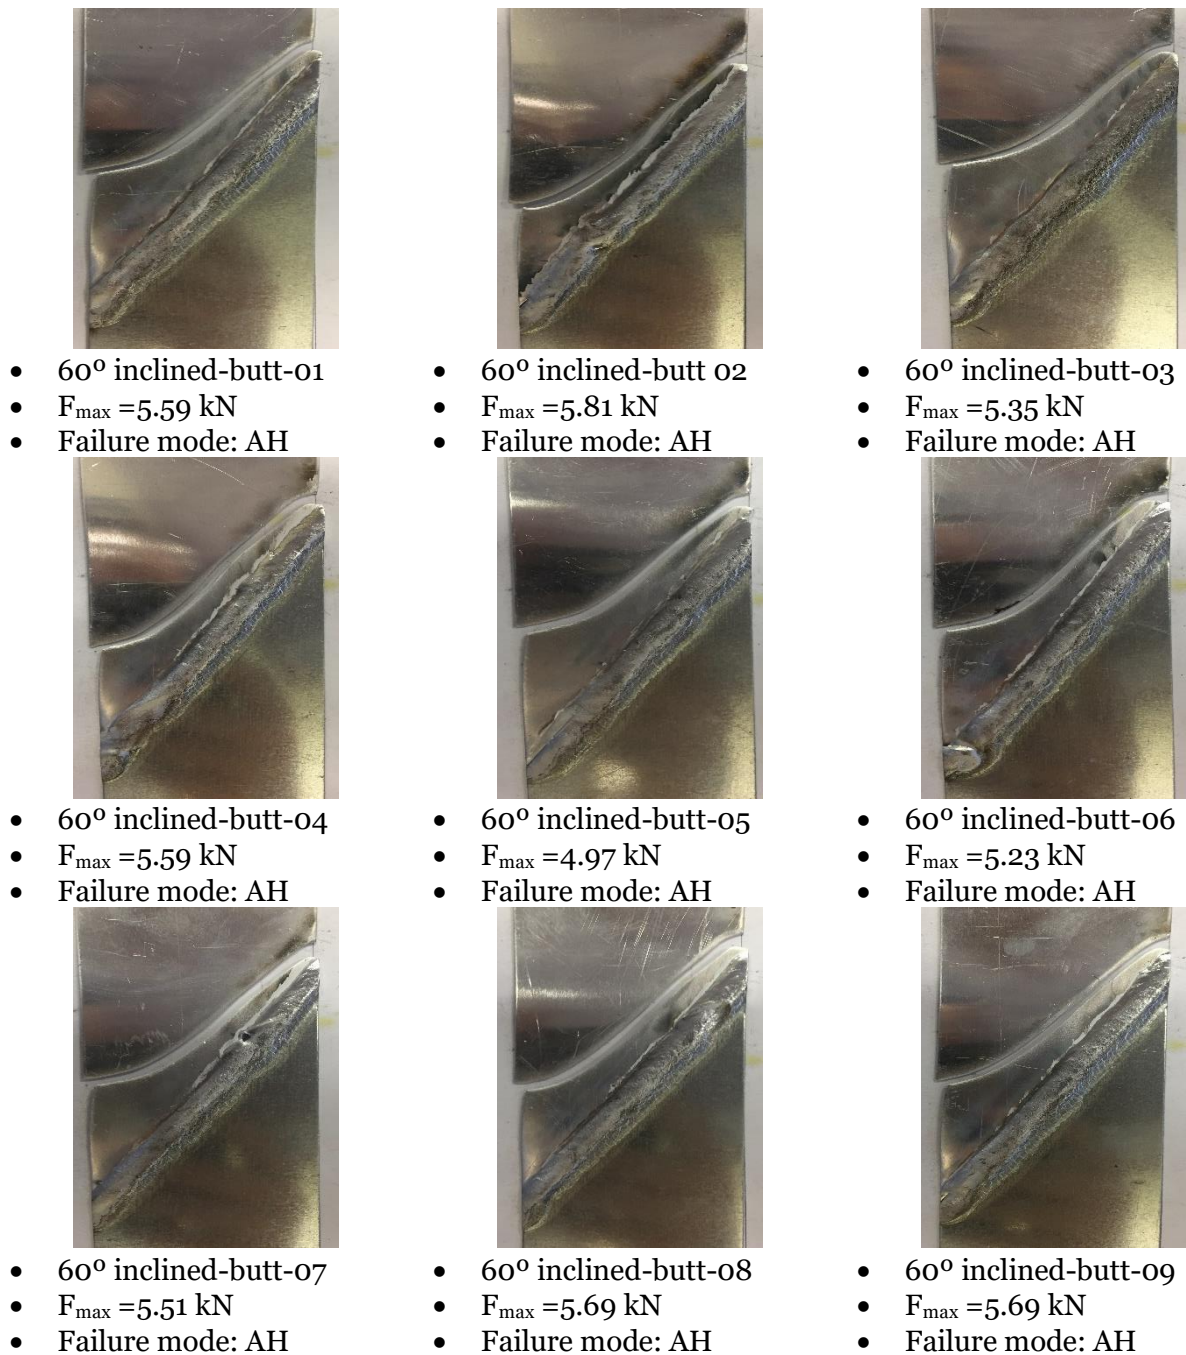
Tensile static failure of 60° inclined butt-welded joints (long-term).
